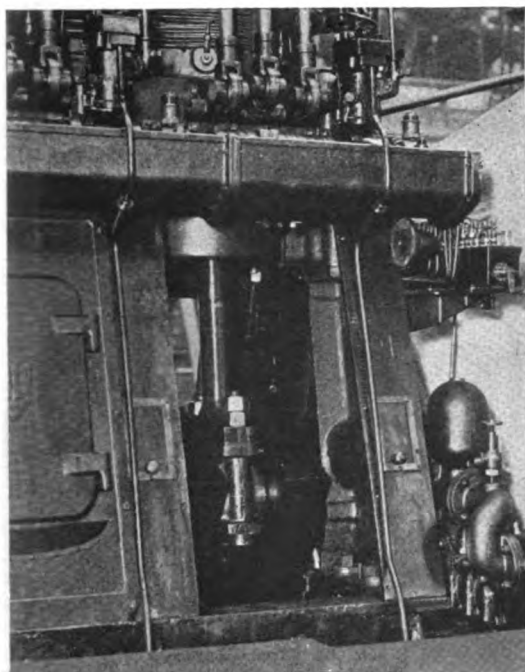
Showing method of taking out the piston. The large side plates allow easy access.
